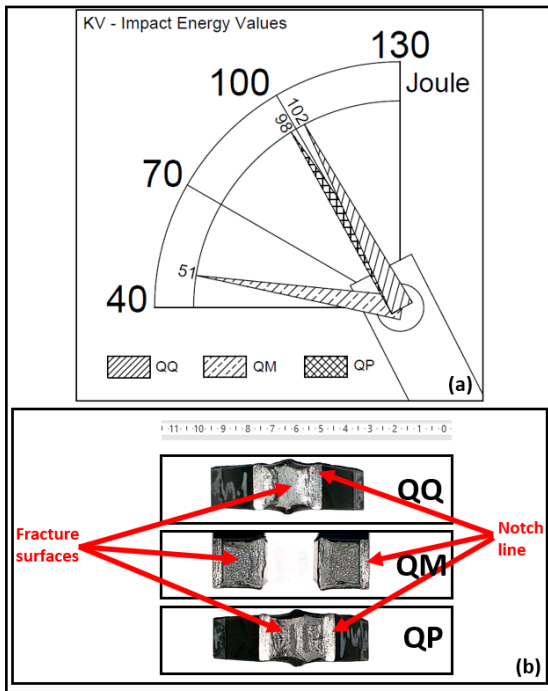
(a): Illustrated KV levels for weld metal.
